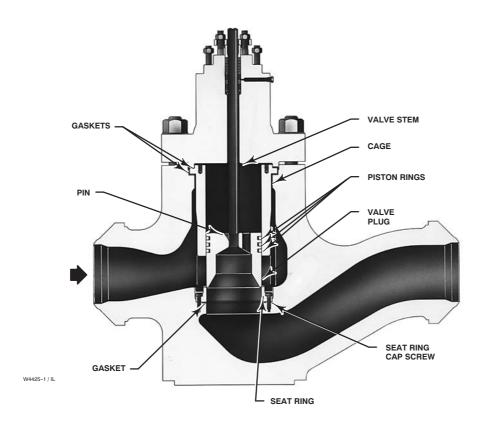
Fisher® EHD Valve Assembly (NPS 8 through 14 Globe Valves)
